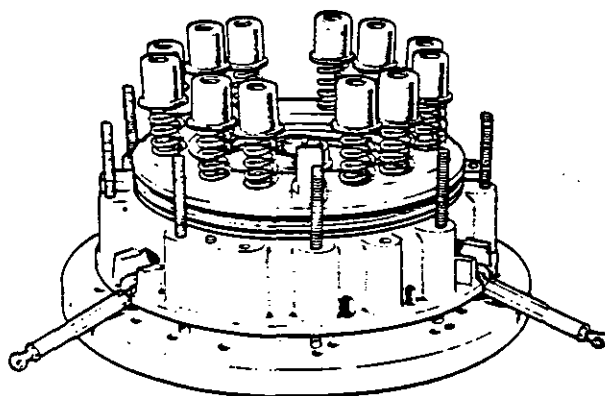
ASSEMBLING TRANSMISSION CLUTCH
